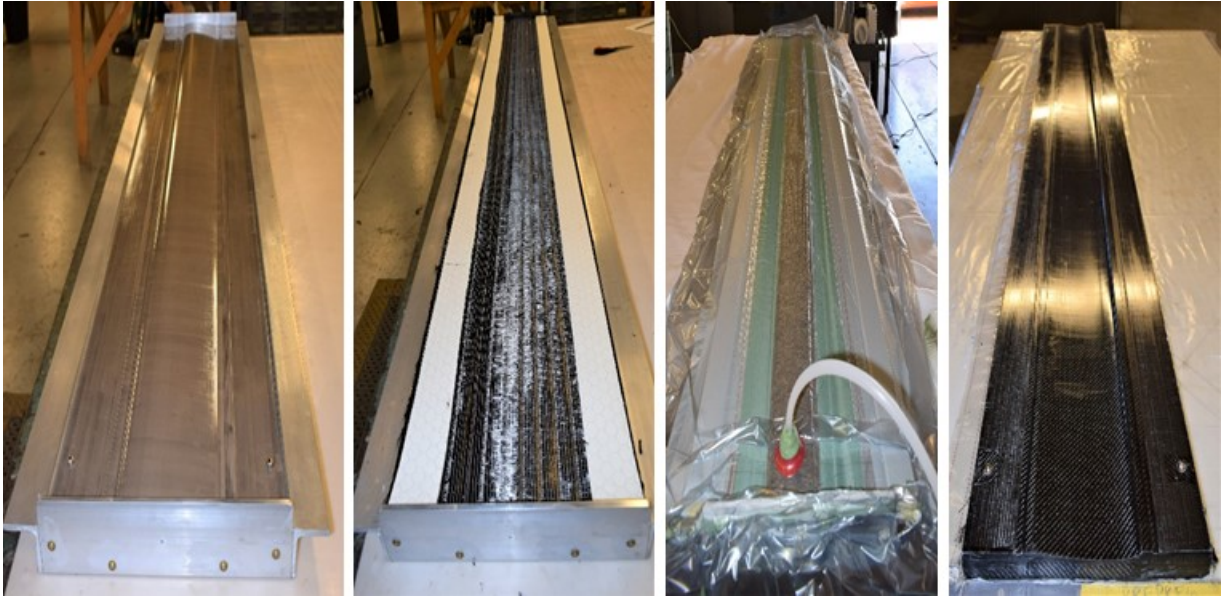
Resin infusion of carbon fiber/epoxy molds. Master with aluminum flanges added (a), partial carbon fiber lay-up showing the foam core flanges (b), Bagged mold (c), bottom surface of mold (d)
